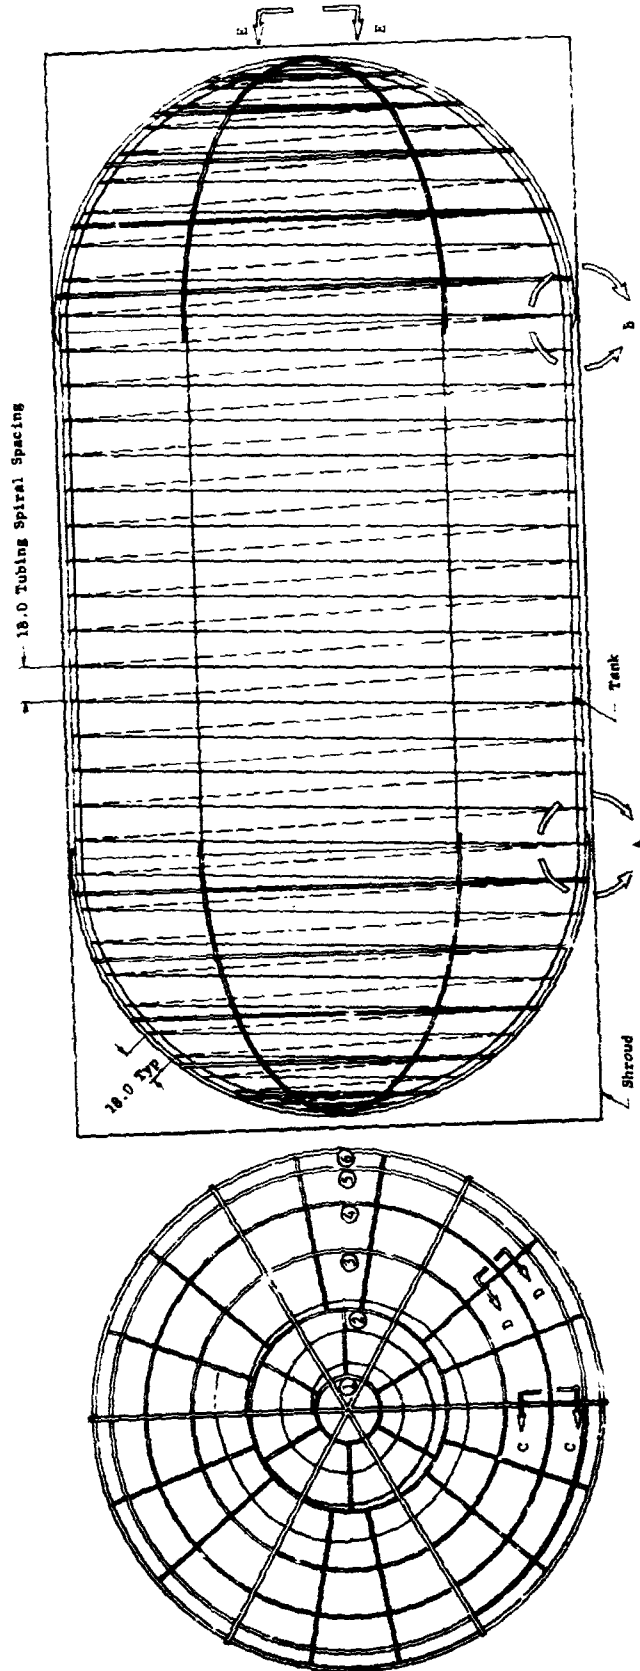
Insulation Heat Exchanger and Dome Truss Assembly
